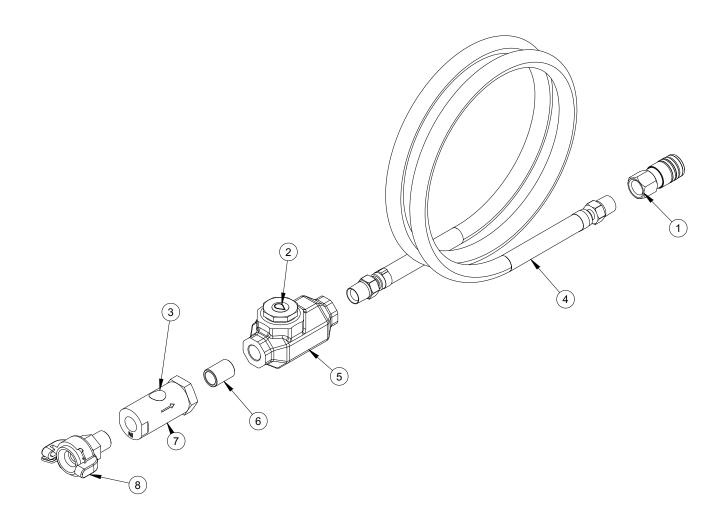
BG38 TOOL HOLDER ASSEMBLY PARTS LIST (P/N 103081)
